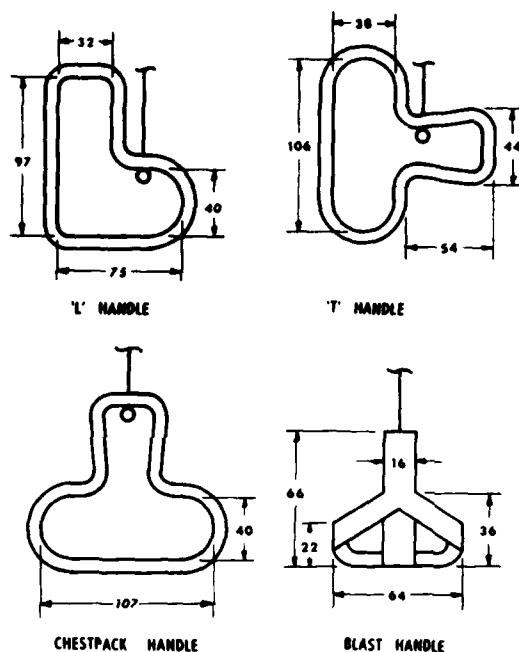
Parachute Ripcord Handles, with Dimensions in Millimeters.
